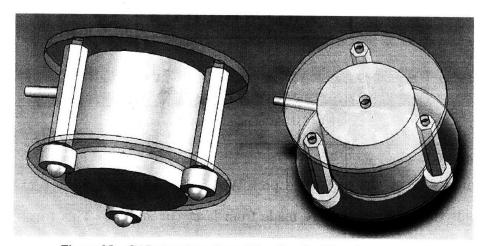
CAD drawing of omnidirectional rolling electromagnet
